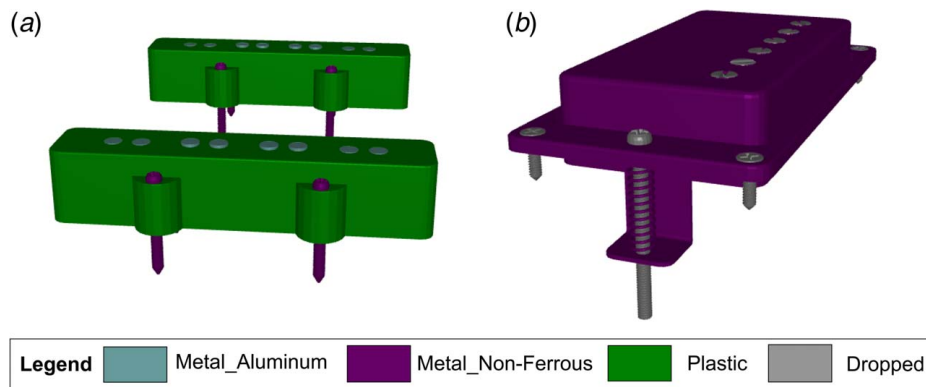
Two sample assemblies where the color of the assembly body represents the material category. The rounded head screws in assembly (a) and assembly (b) are made of different materials, despite their geometric similarity.
